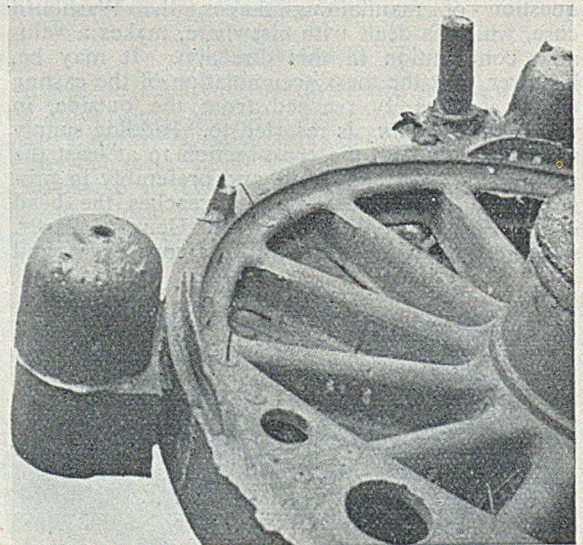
Wheel Casting for which an Atmospheric-pressure or "Williams" Head was employed.
